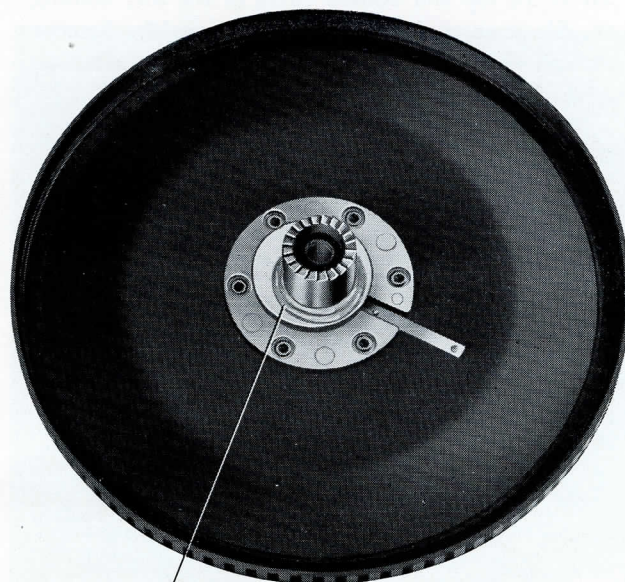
MODIFICATION OF EARLY TYPE SPINDLE ASSEMBLY.
